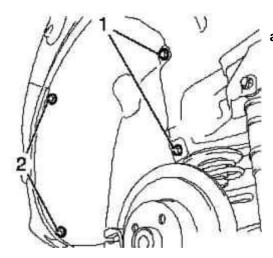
Mounting lining wheel arches: 1 - Nuts 2 - Bolts
